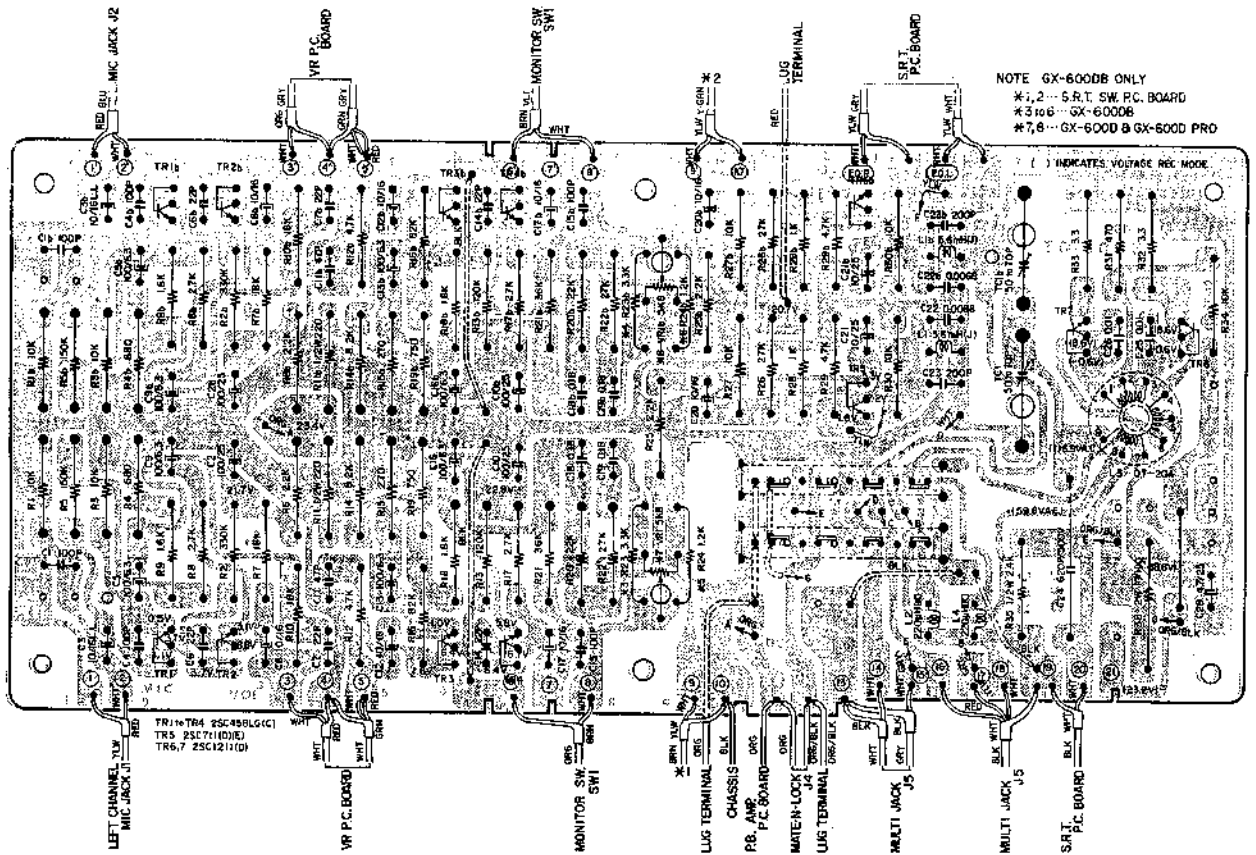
REC. AMP./OSC. P.C. BOARD TD-5003 (Reverse Side)
